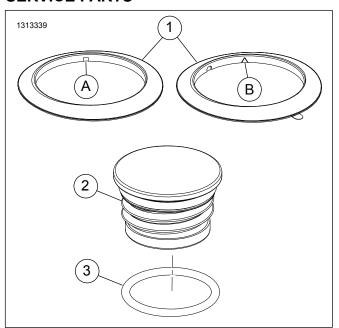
Service Parts: Flush-Mount Gas Cap Kit
